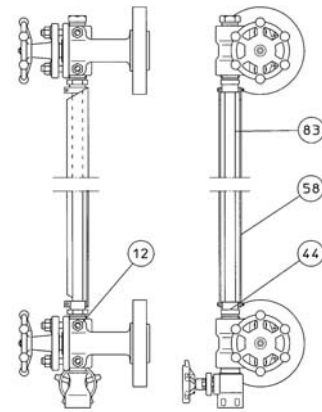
Type BTV-GP11 tubular glass level gauge
